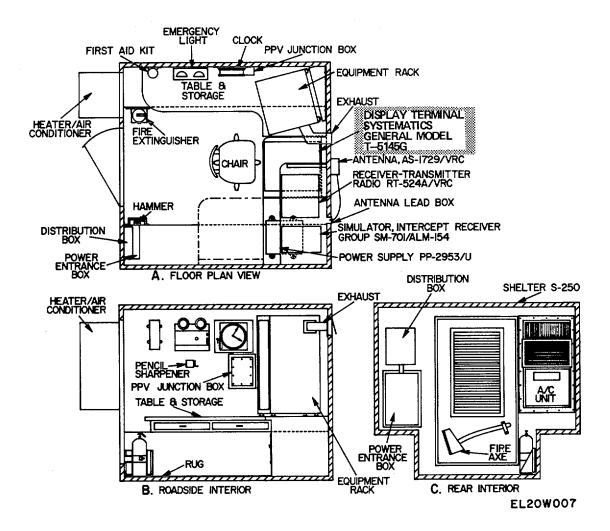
(1) Modified Shelter, Internal Views (Sheet 1 of 2).
